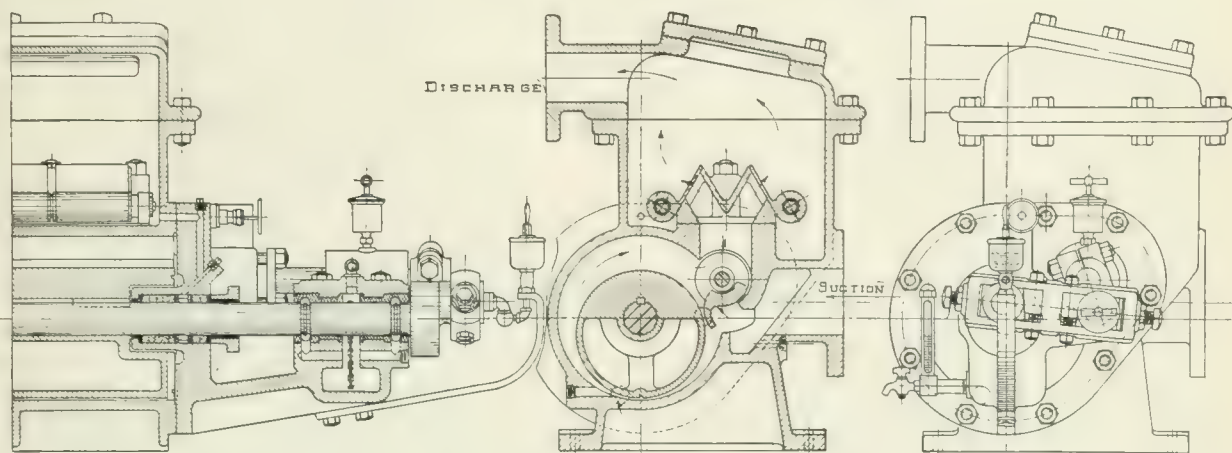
Axial and End Sections and End Elevation of the Rotrex Pump Built by the C. H. Wheeler Mfg. Company, Philadelphia, Pa.
